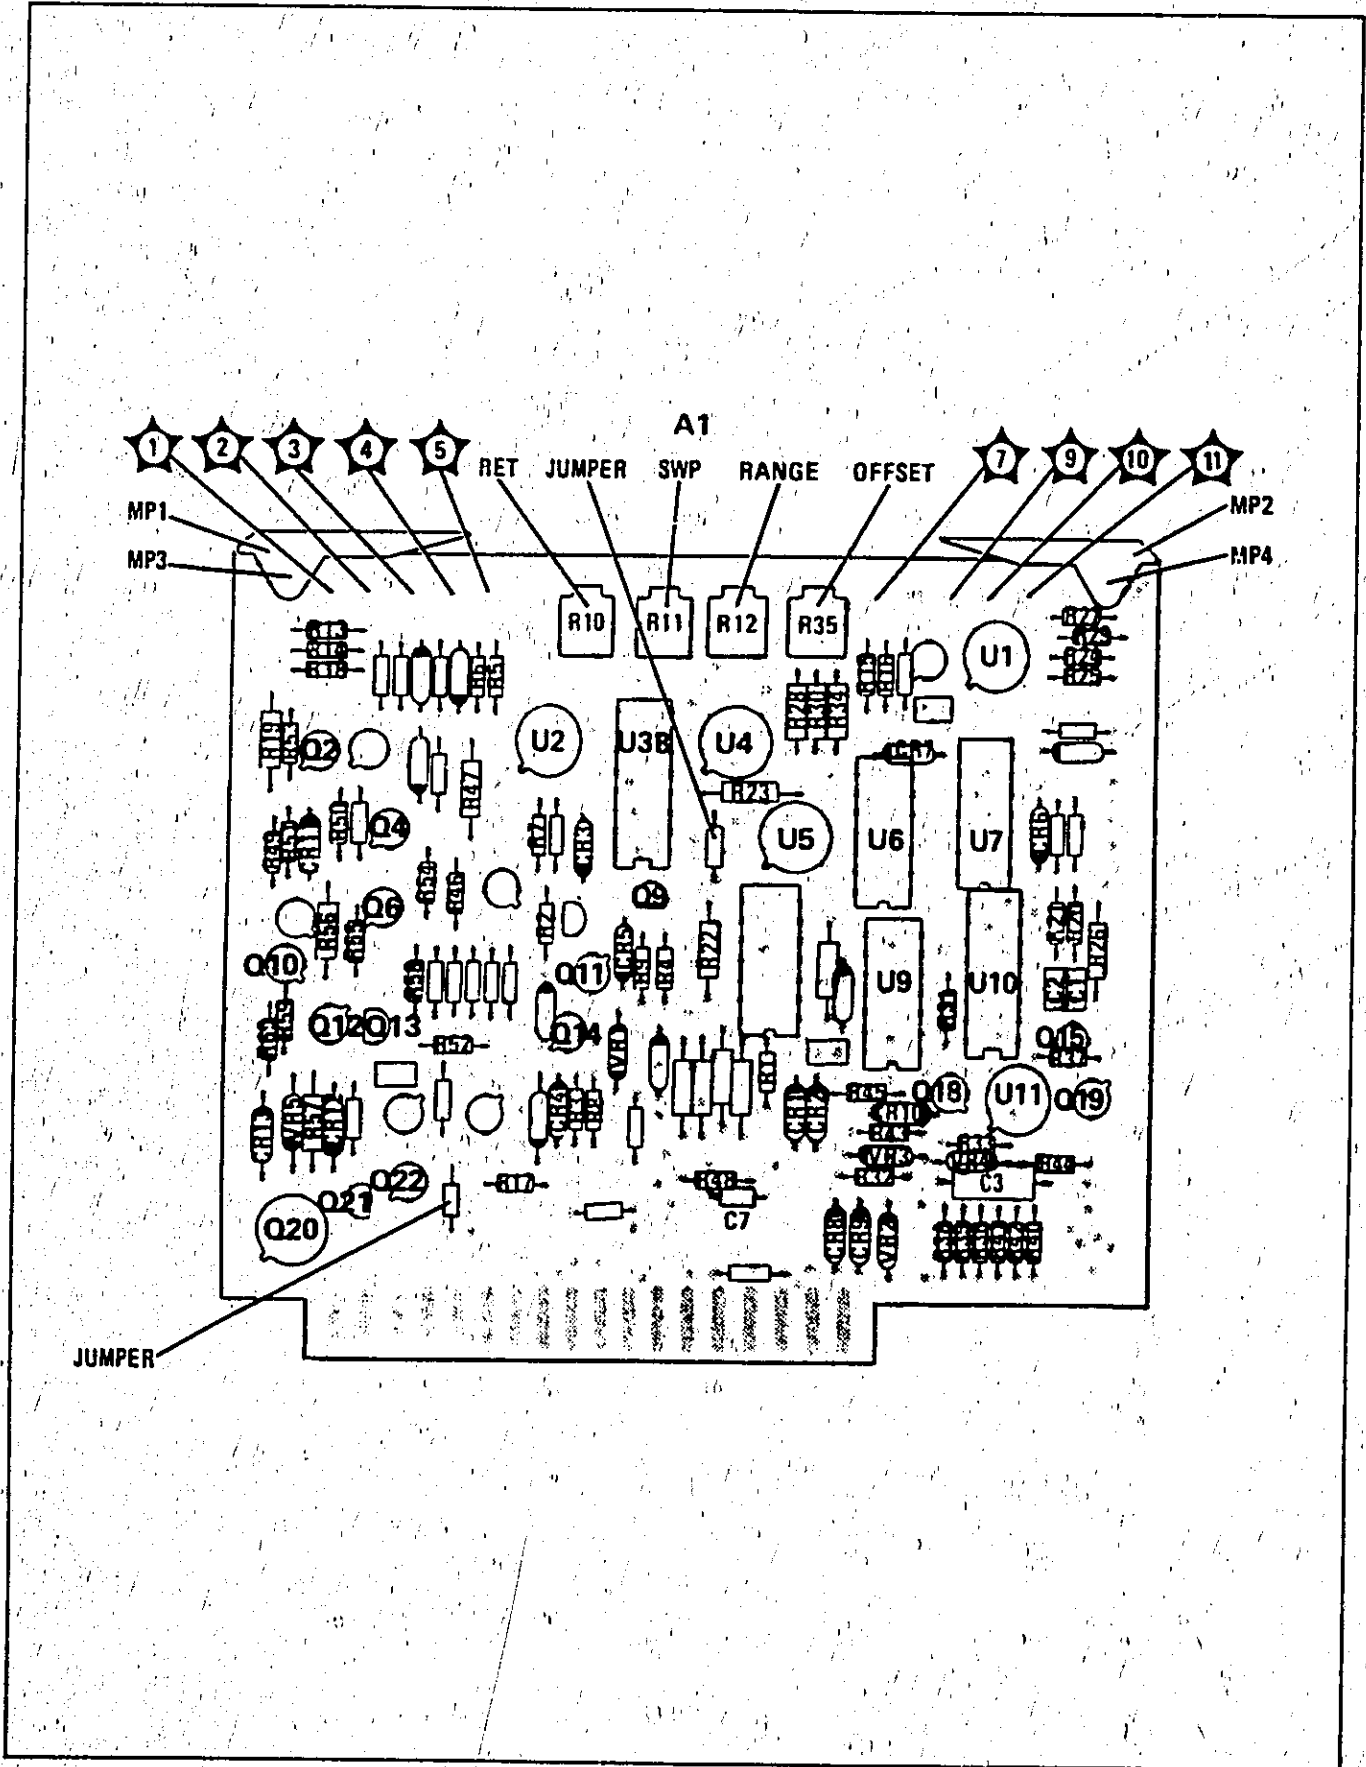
P/O A1 Sweep Generator Assembly, Component Locations (CHANGE 5)
